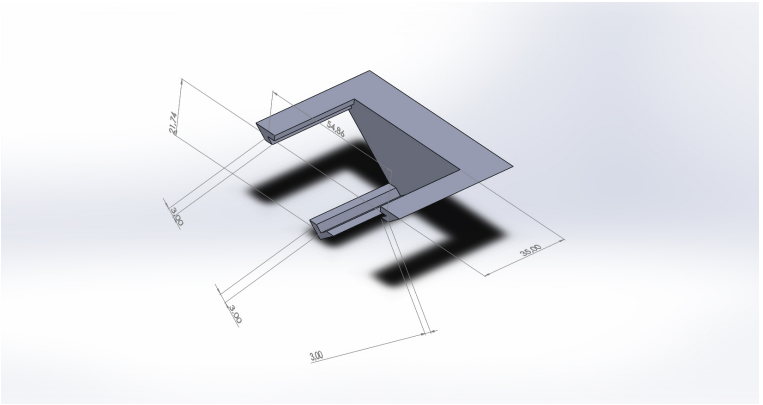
Prism holder structure designed by using SolidWorks software.
